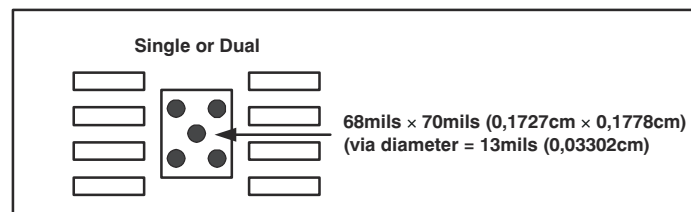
PowerPAD Integrated Circuit Package PCB Etch and Via Pattern
